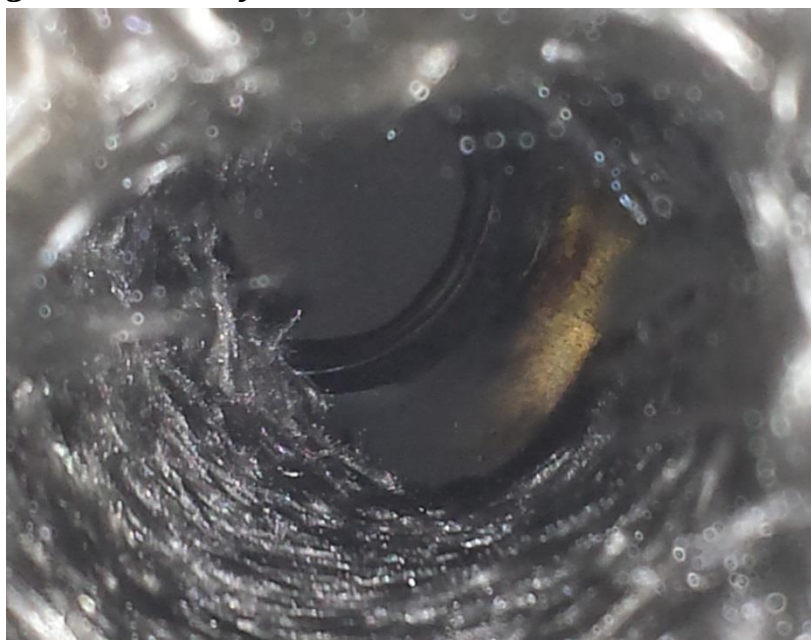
The hollow space formed at the closed end of the stainless steel muffler's absorptive section, viewed through the cavity from the removed perforated tube.
